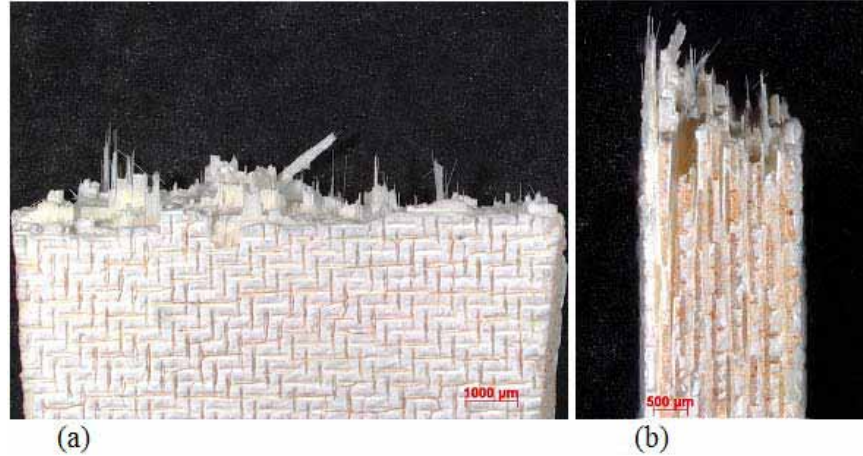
Fracture surface of C4 composite specimen tested in tension to failure at 1100 °C in laboratory air: (a) front view and (b) side view.
